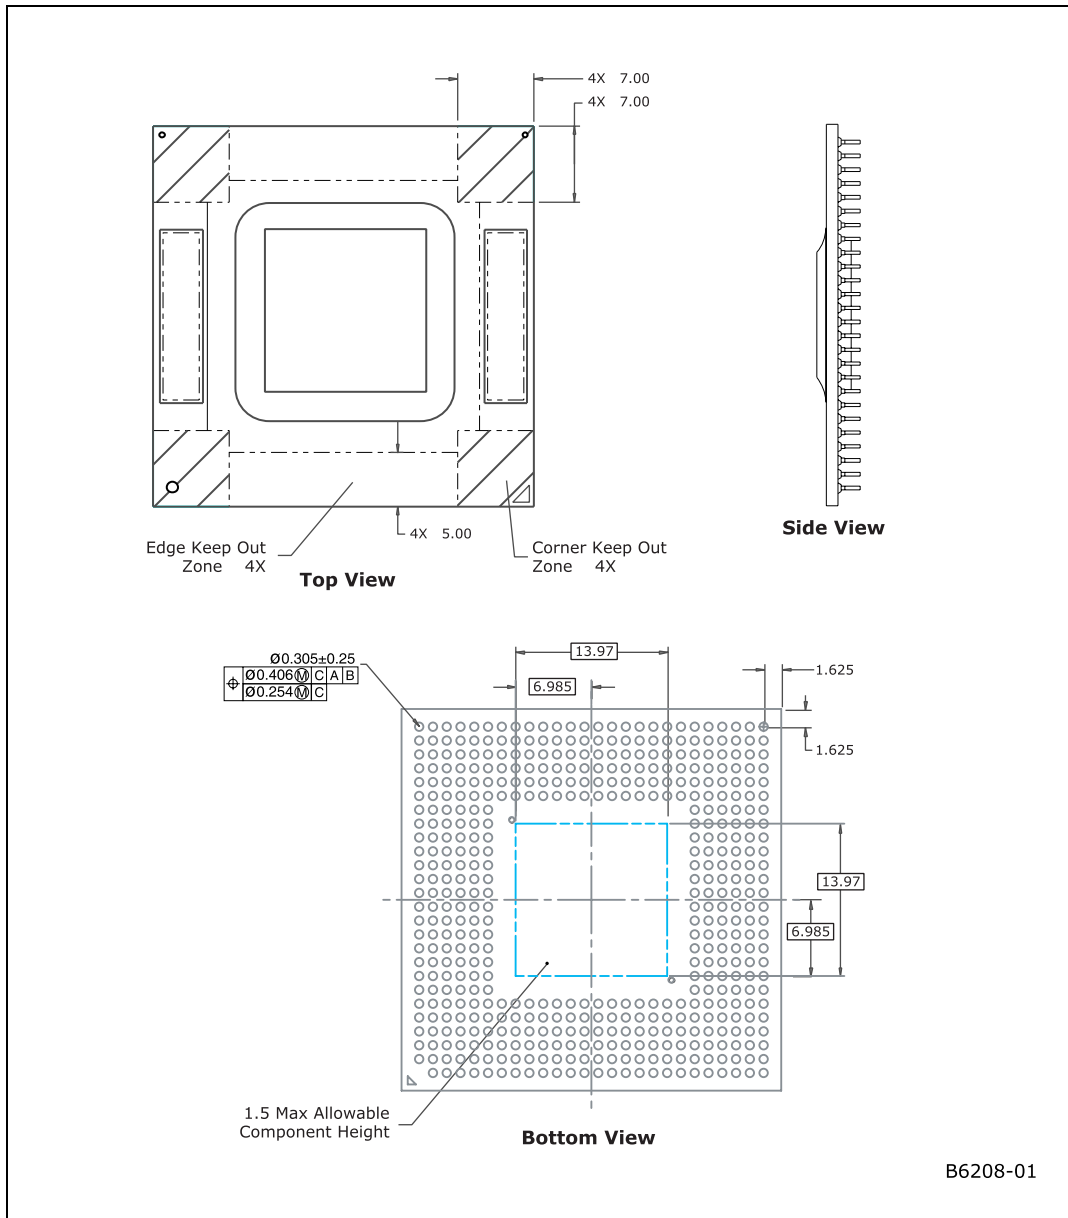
1-MB Micro-FCPGA Processor Package Drawing (2 of 2)
